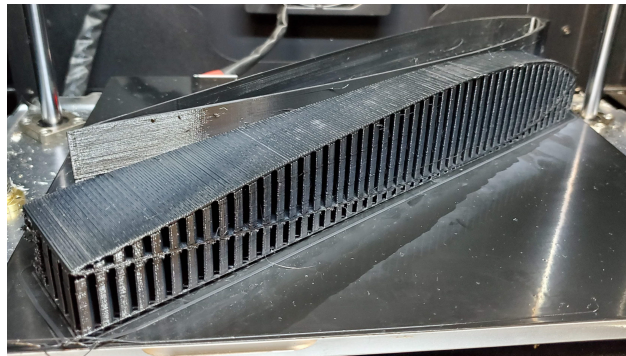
Wing mount printed with PETG in the QIDI X-max 3D printer
